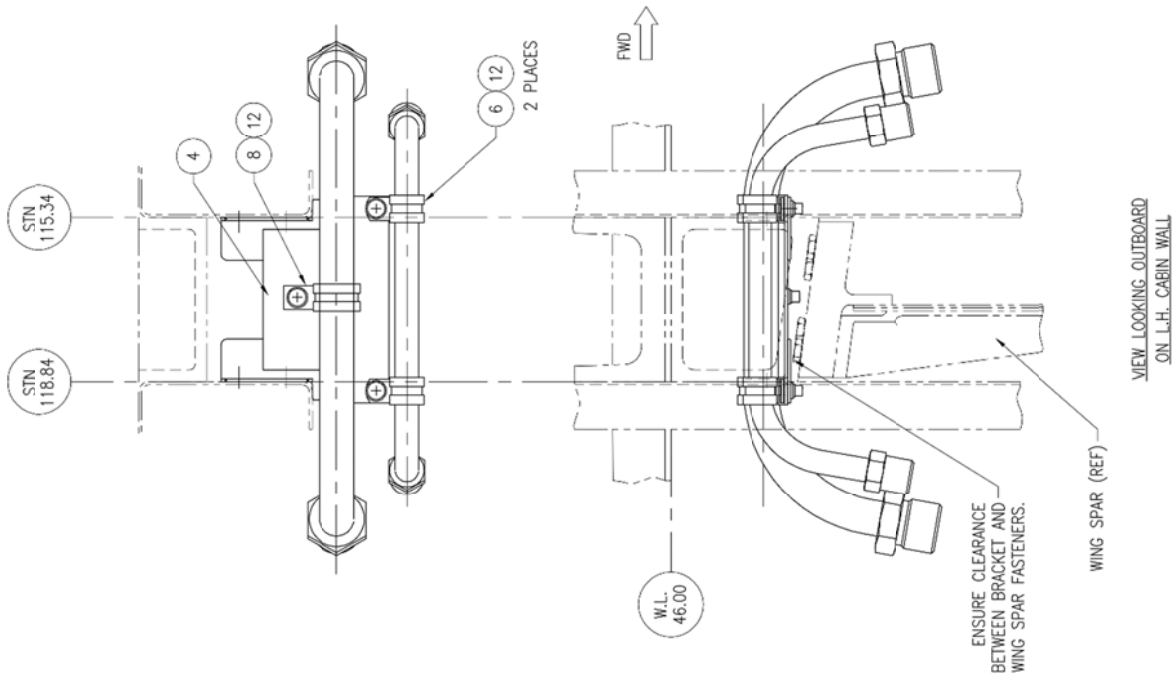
ALUMINIUM TAPE INSTALLATION – WING SPAR
